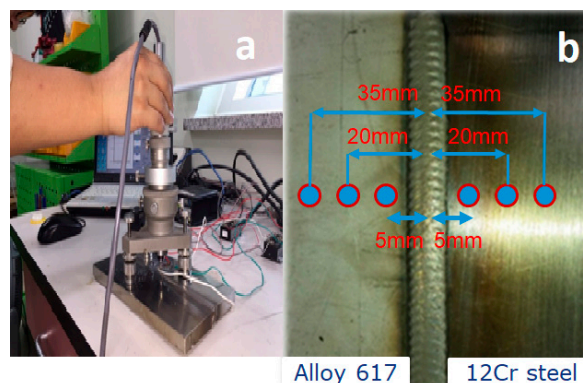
(a) RS-200 milling guide, (b) position of hole drilling.
